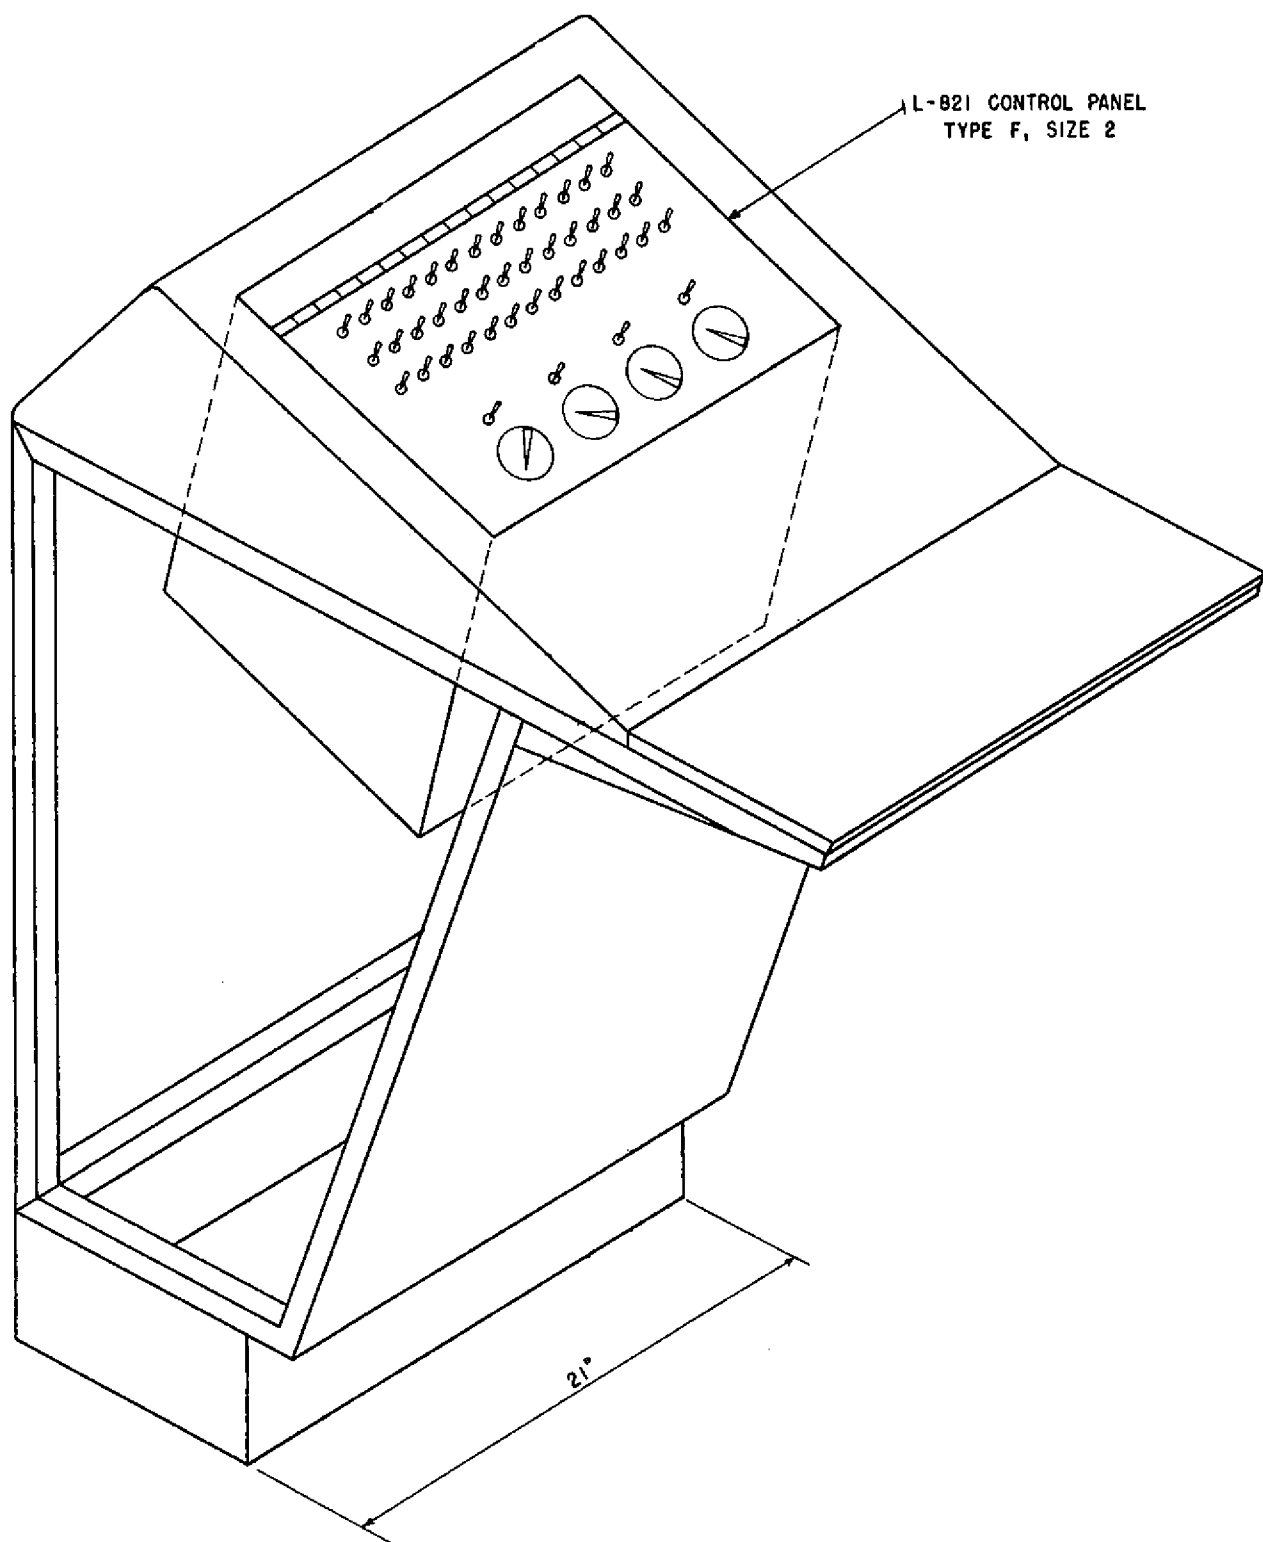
L-821 CONTROL PANEL INSTALLED IN CONSOLE
